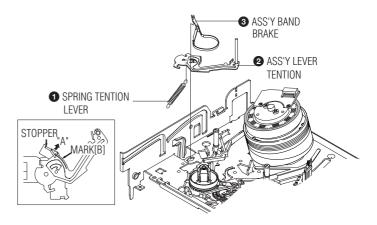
Ass'y Lever Tension, Ass'y Band Brake Removal
